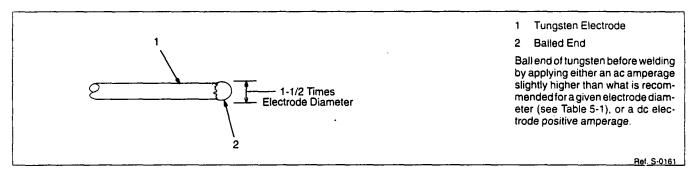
Preparing Tungsten For AC Or DC Electrode Positive (DCEP) Welding
